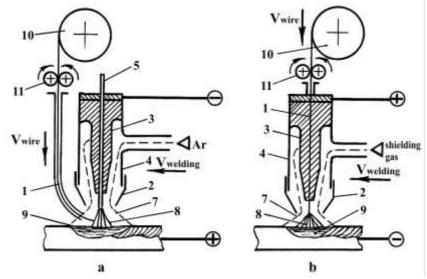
Semi-automatic shielding gas welding with non-consumable (a) and consumable (b) electrode: 1 -wire; 2-nozzle; 3-guide sleeve; 4- torch; 5-W-eletrode; 7-shielding atmosphere; 8-arc; 9-welding bath; 10-cassette; 11 – rollers for moving of wire
